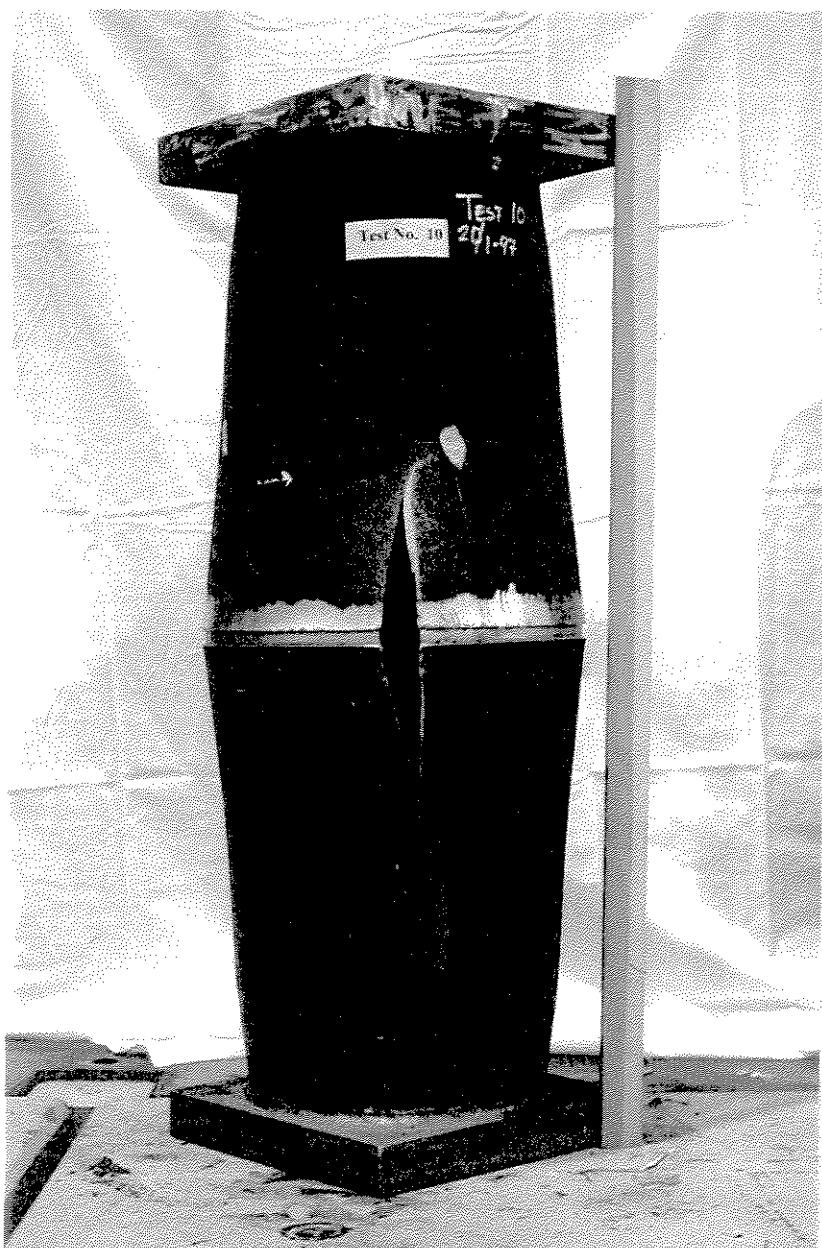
Picture of the test specimen no. 10 after the burst test
